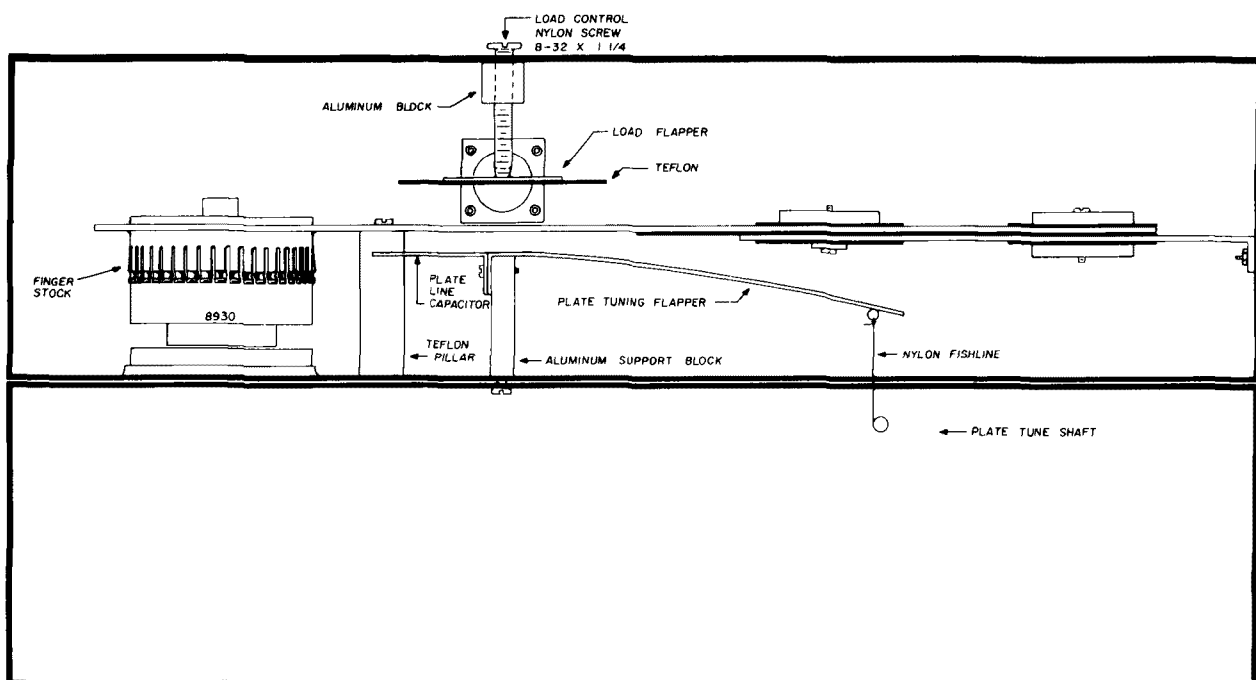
Cross-sectional view of the two-meter kilowatt showing the location of the plate circuit components.
